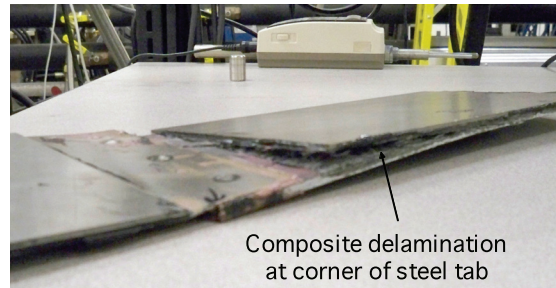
Composite delamination at corner of steel reinforcement tab of weld bonded torsion specimen.
